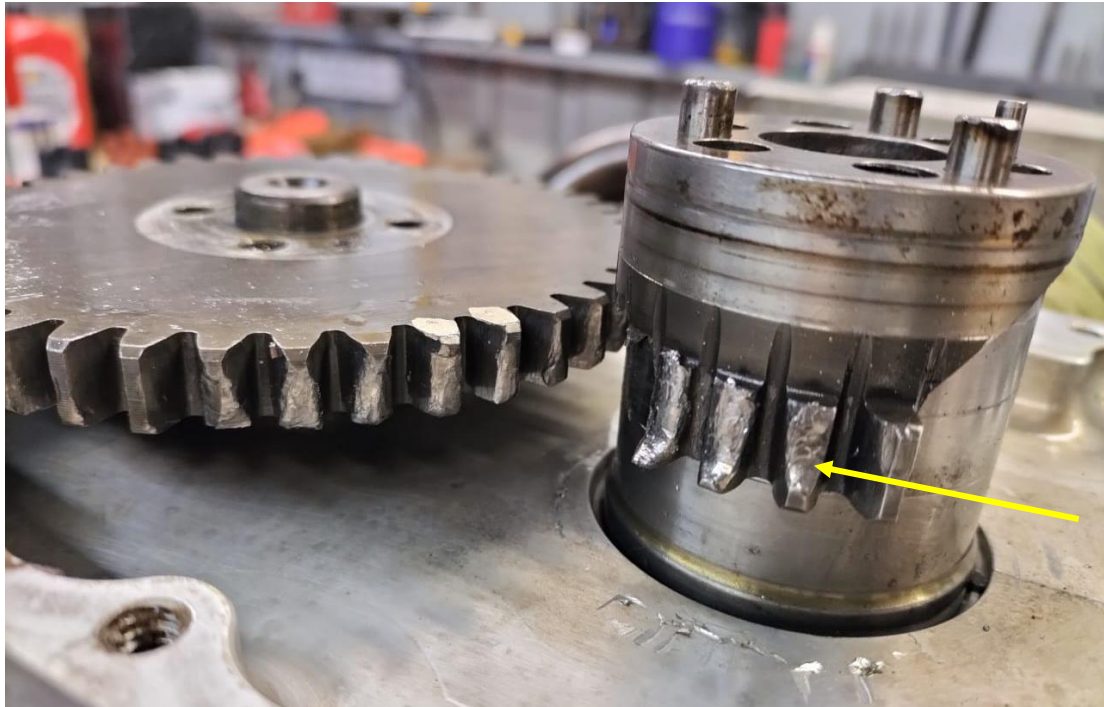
The crankshaft gear assembly that failed, indicated by the yellow arrow.
